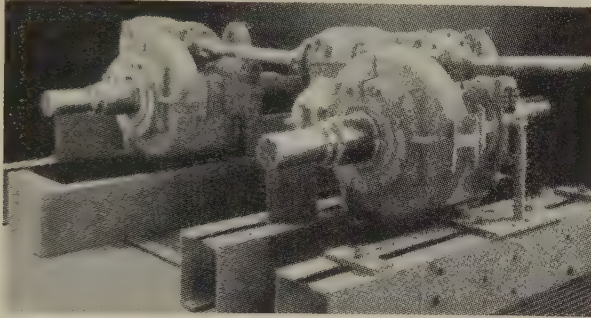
Axle drives with straight and conical gears at the test plant.
